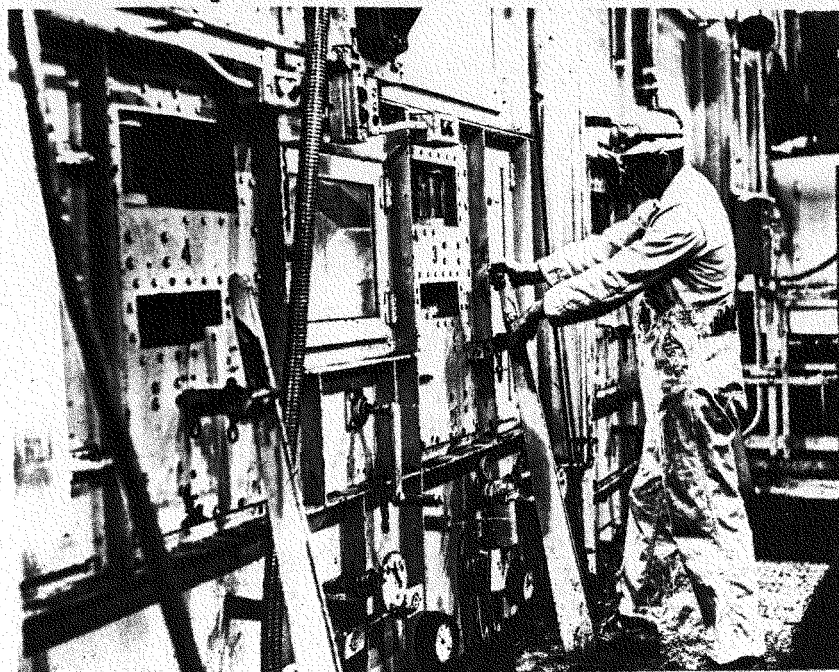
Close-up of furnace bulkhead. Operator is using a mechanical lever to knock-out bottom pour plug.
